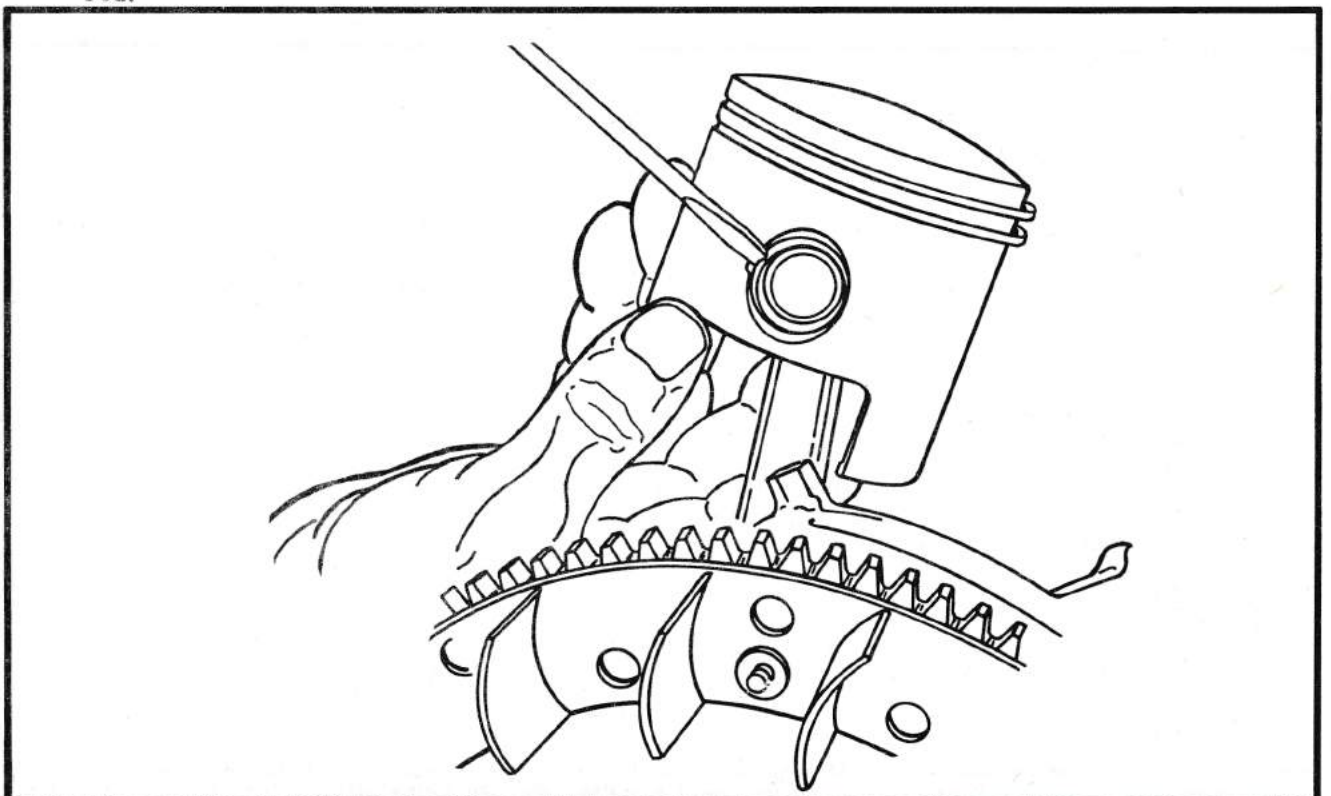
REMOVE CIRCLIPS FROM BOTH ENDS OF PISTON, PUSH PIN OUT WITH EXTRACTOR TOOL
